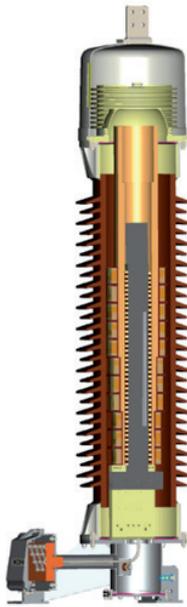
Cross-section drawing of an open-core voltage transformer.
